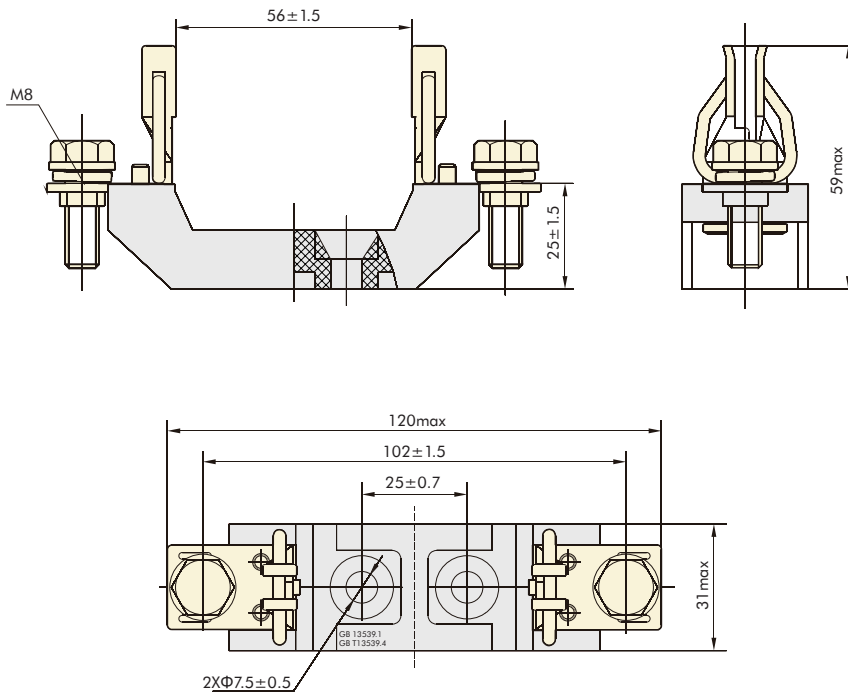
CRT36-00 250A Pedestal appearance and installation dimensions
